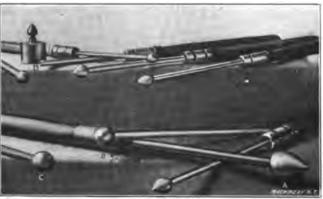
Metal Spinning Tools with High-speed Steel Removable Heads
